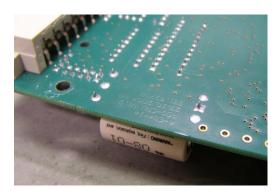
The soldered battery's soldering joints with three soldering lugs
